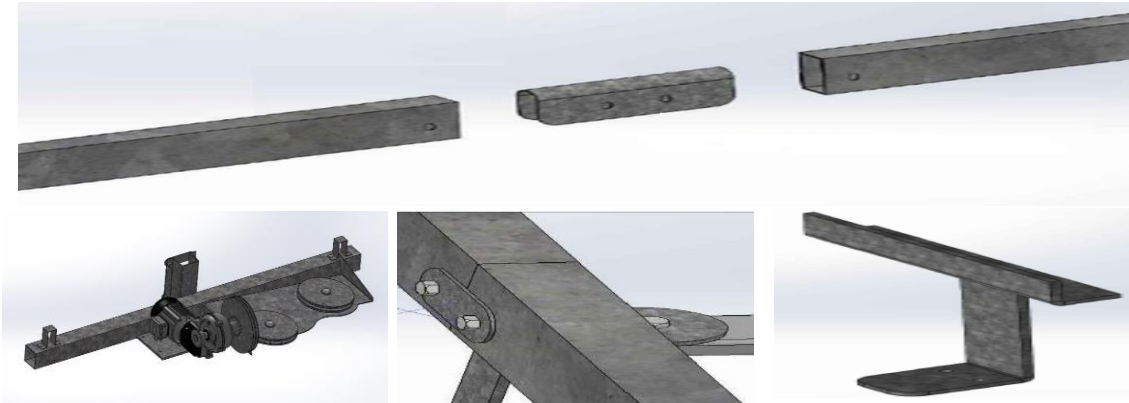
Solidworks drawing of the rail system and butt gear reducer
